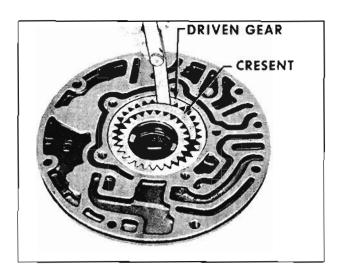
Checking Clearance gear and pump body. The clearance allowed is .004" to .006". (Fig. 6-333)
